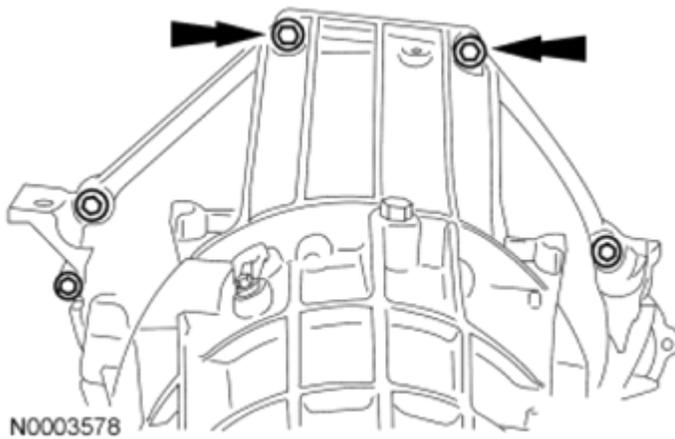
Locating Upper Transmission-To-Engine Bolts
